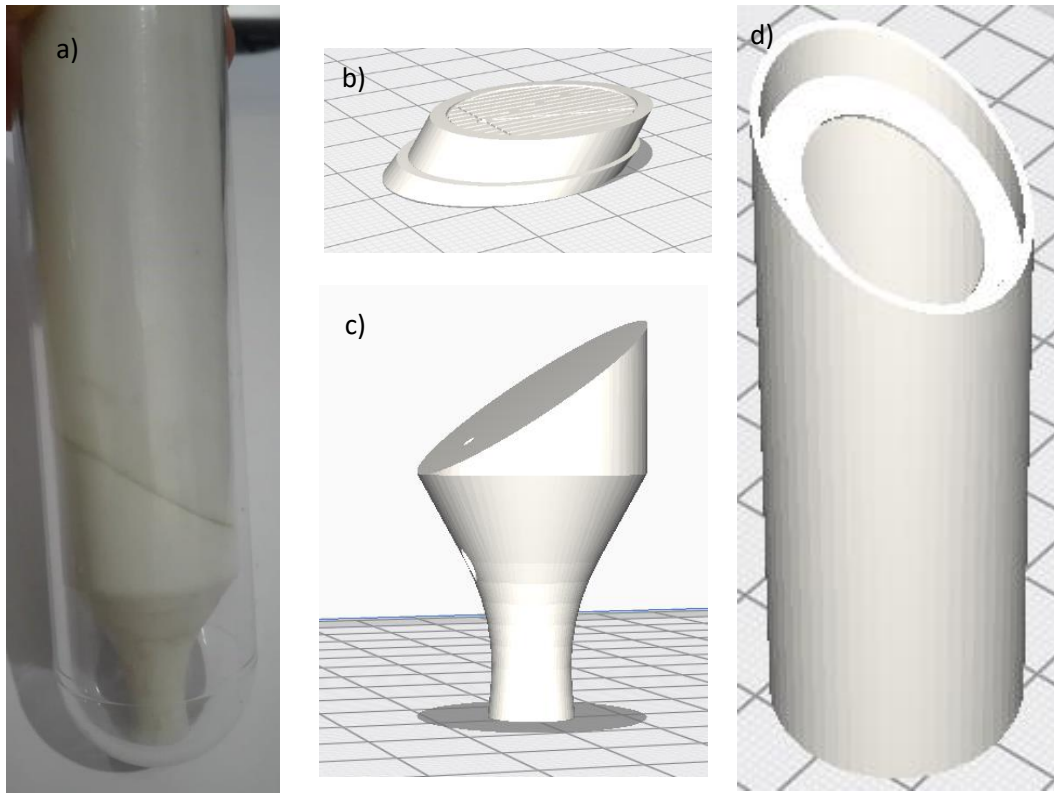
Several views of the modular device a) Side view of printed device; Cura view of b) membrane support part, c) module support part and d) Module part;
